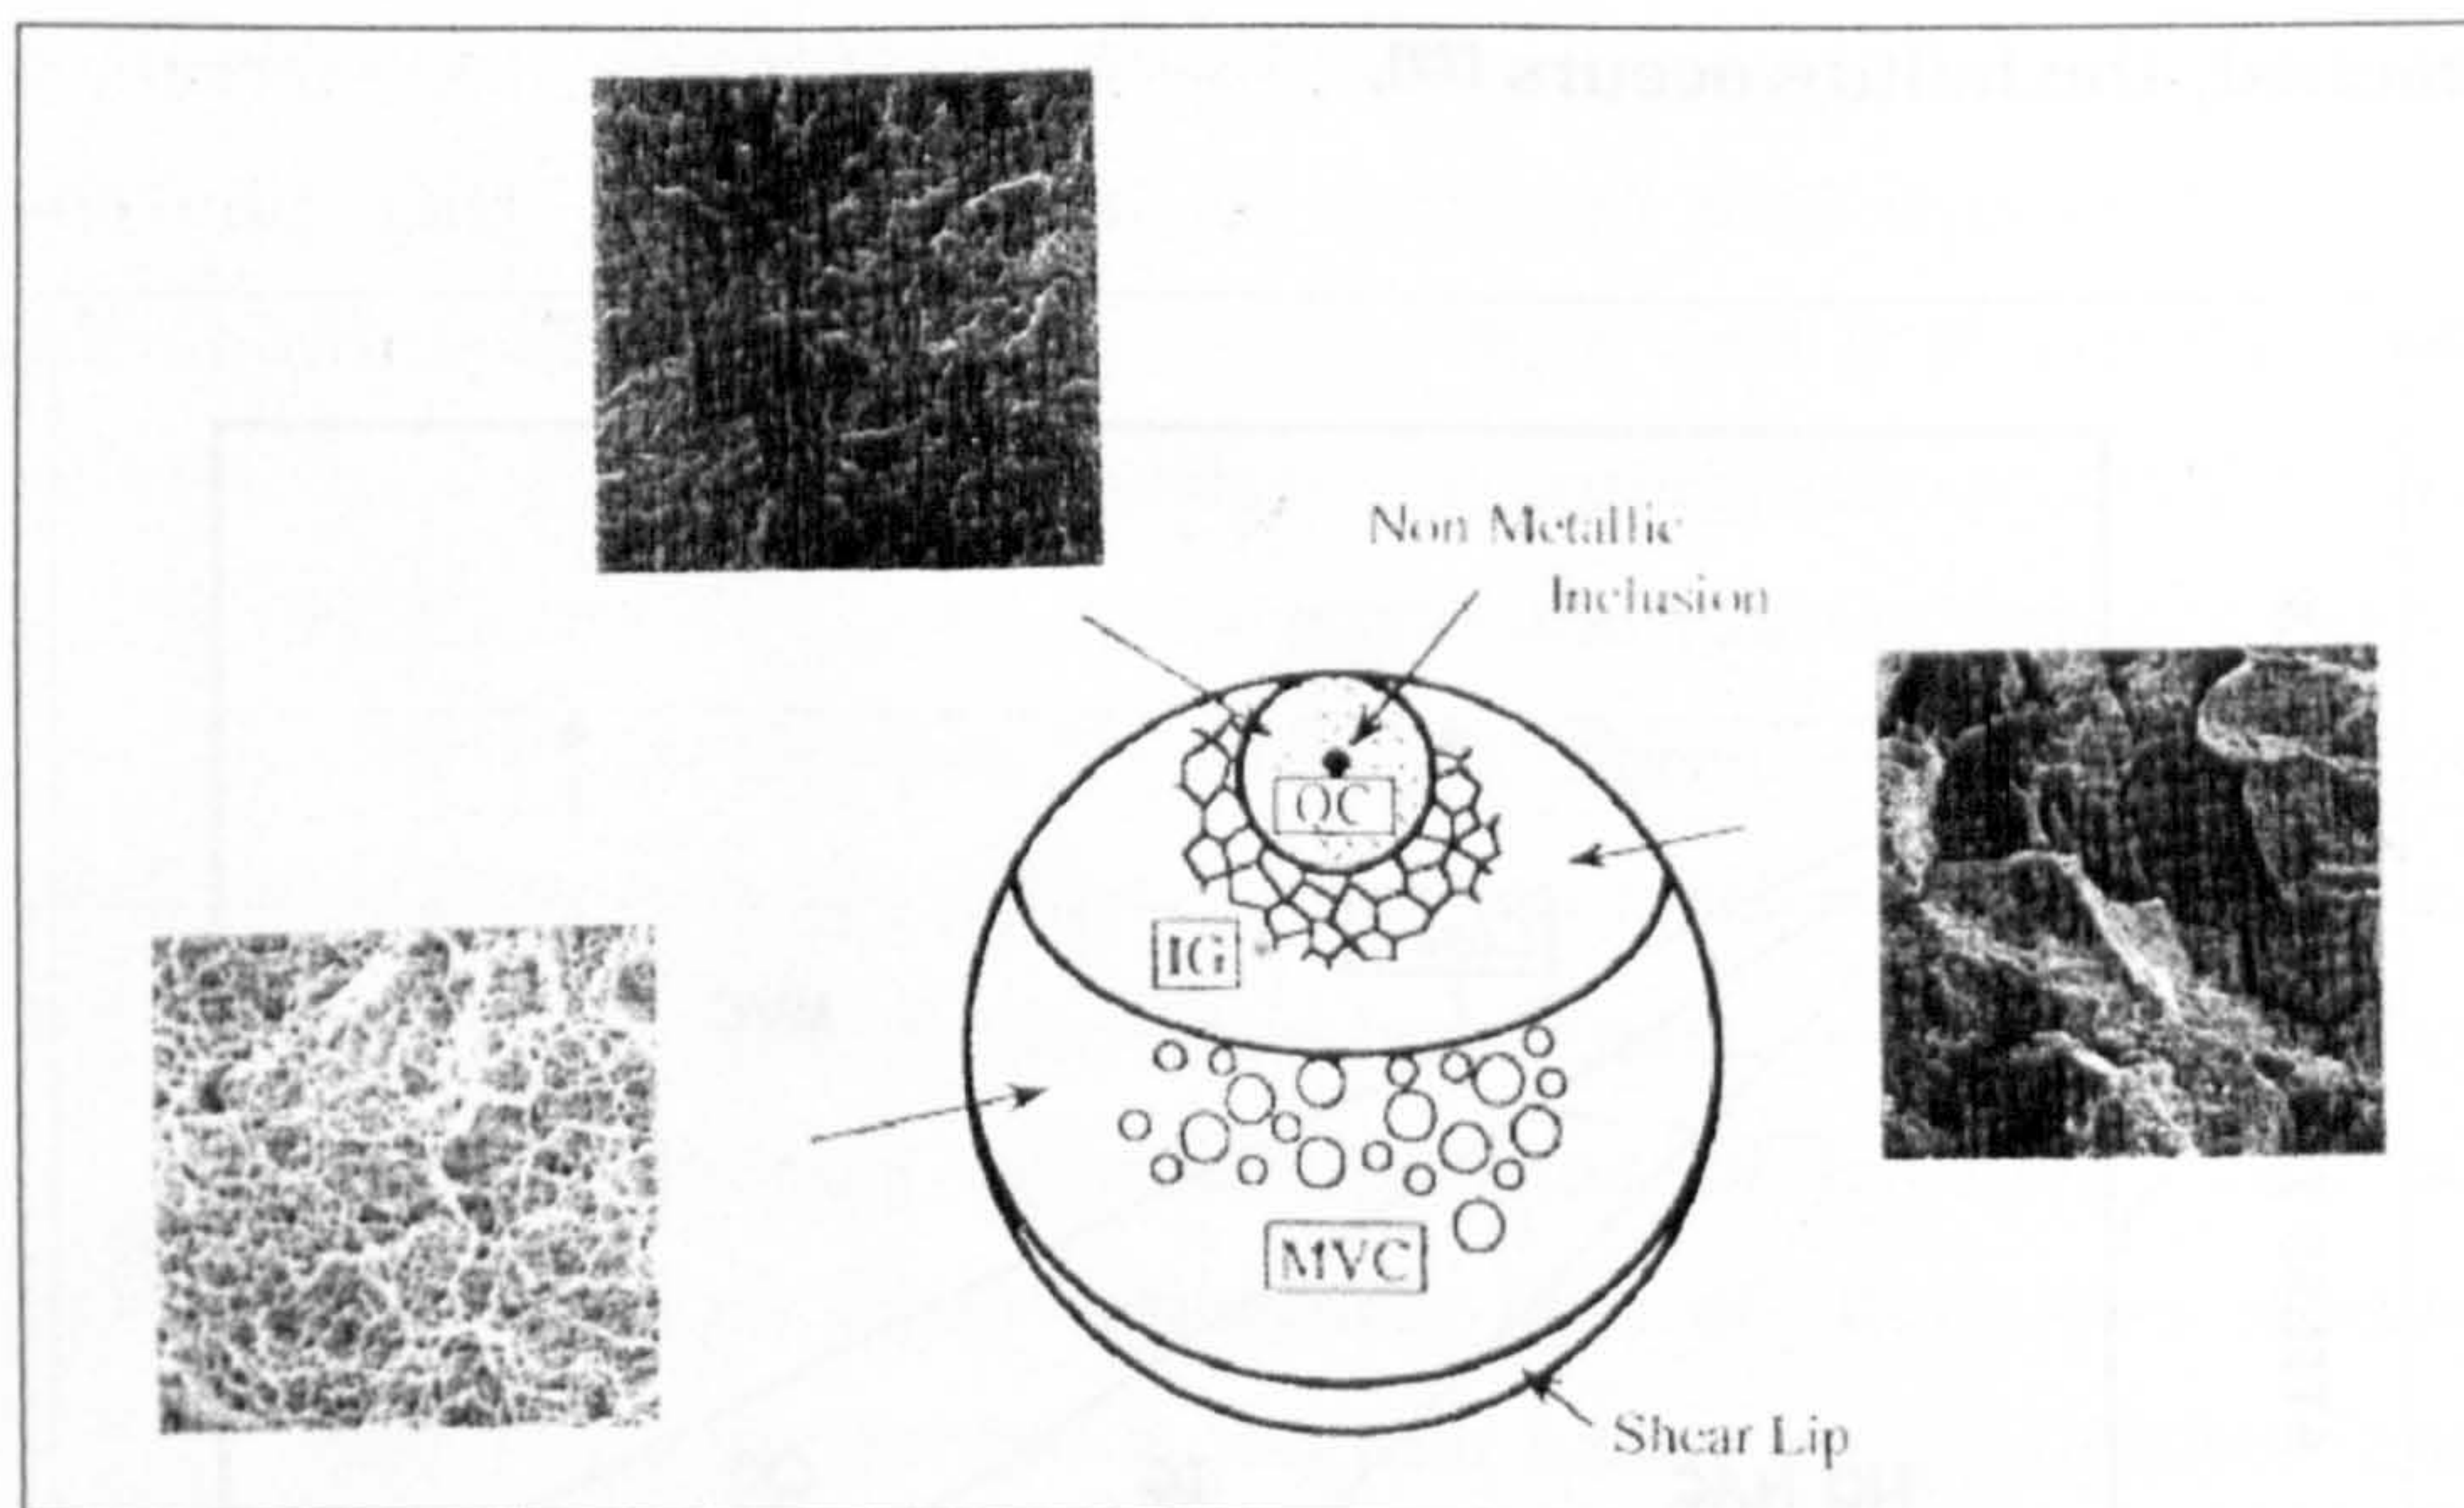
Fractographic illustration of the hydrogen cracking process appeared in the fracture surface ^[98]
